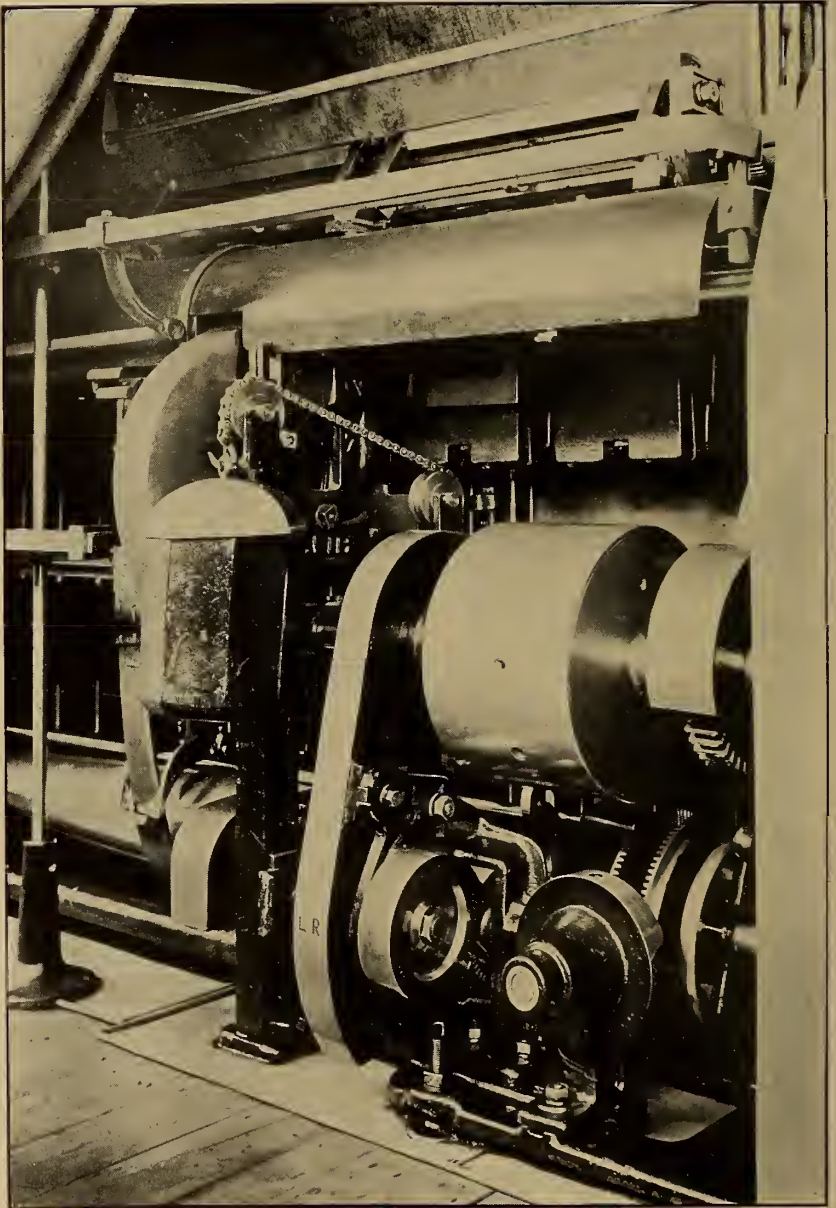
GUARDS OVER DIFFERENT WHEEL TRAINS IN THE HEADSTOCK OF A SPEED FRAME
